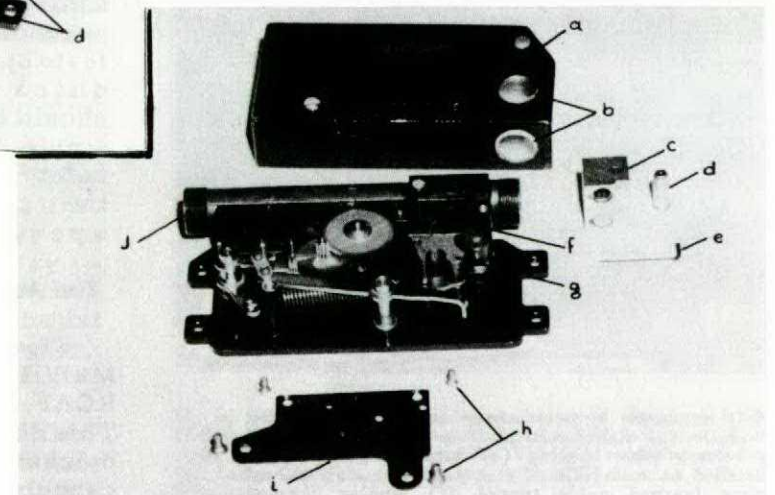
Assembly of G-Q automatic harness release mechanism. (a) arming wire (b) barrel end-cap (c) breech block (d) .22 calibre (rim fire) blank cartridge (e) breech block locking pin (f) breech (g) firing hammers (h) top plate securing screws (i) top plate (j) barrel.
